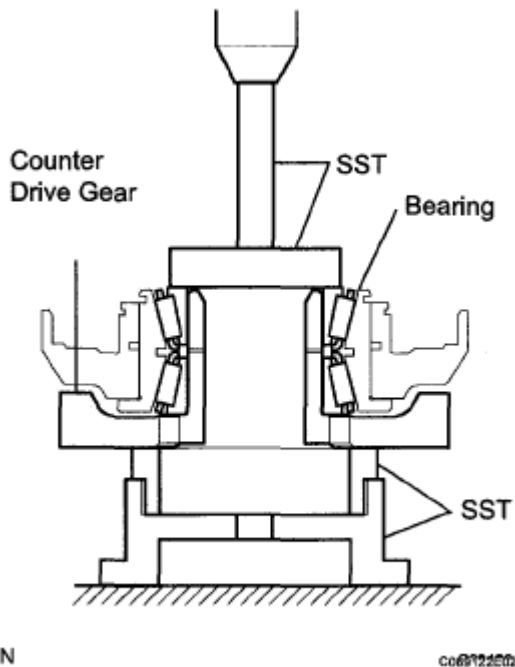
Installing Tapered Roller Bearing To Counter Drive Gear
